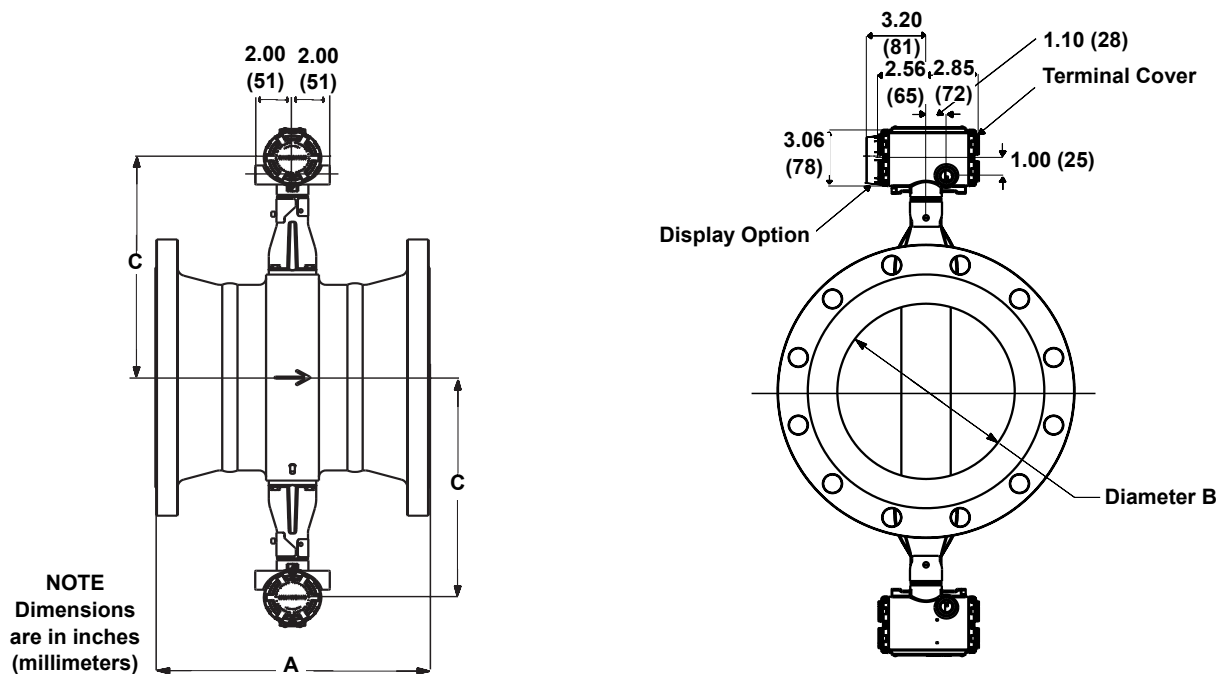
Vortex Dual-Sensor Style Flowmeter Dimensional Drawings
